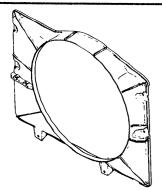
Radiator shroud (for the model equipped with air conditioner)
